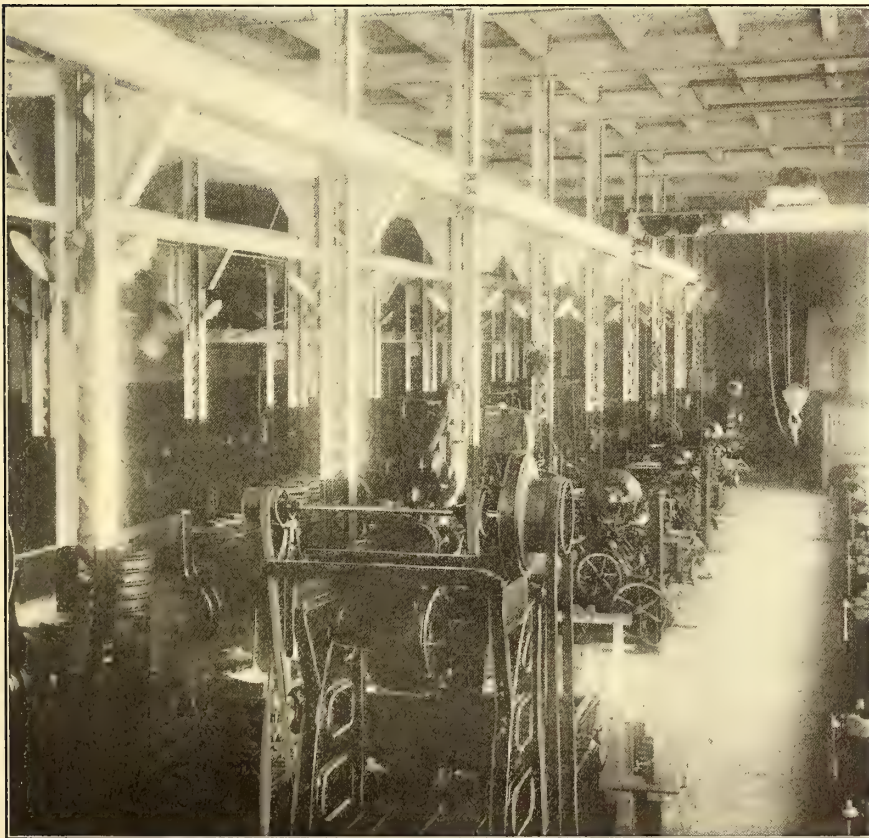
LOOKING DOWN ONE OF THE MACHINE SHOP BAYS ON THE GILLEN PLACE SIDE
